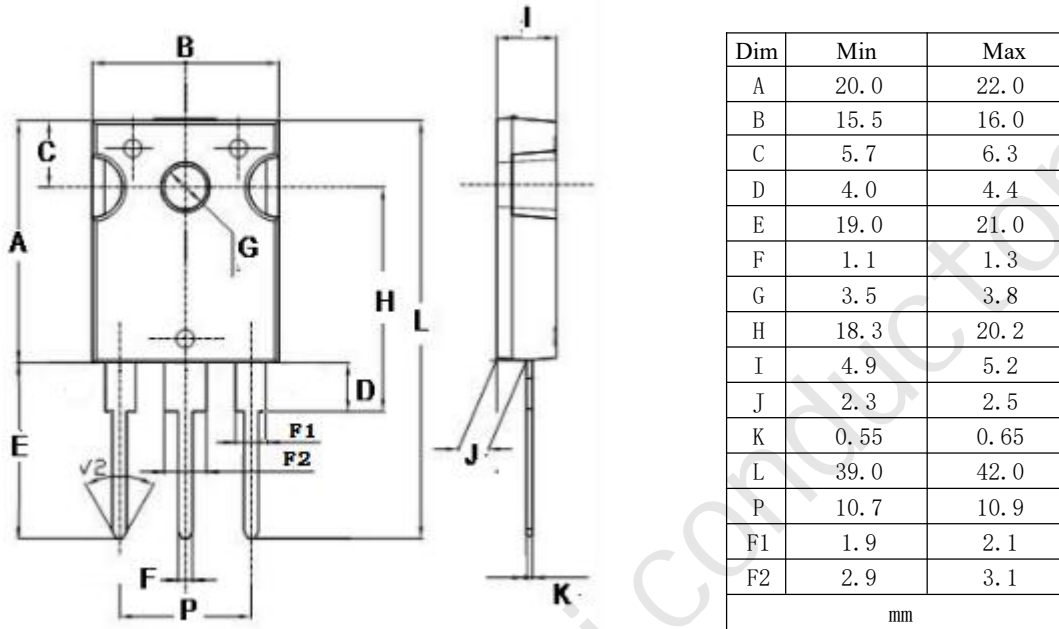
outline dimensions (unindicated tolerance: $\pm 0.1\text{mm}$)
